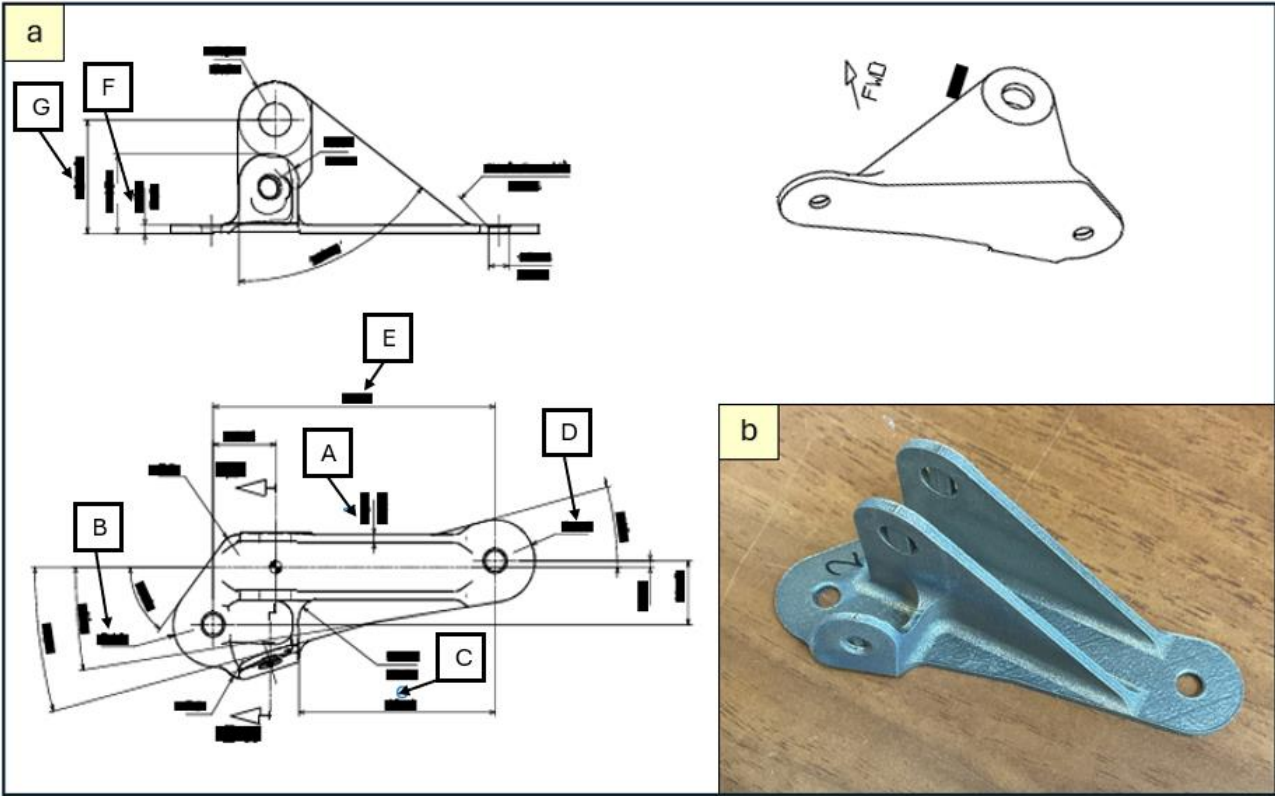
a) Clevis technical drawing (© Leonardo S.p.A.) b) Clevis perspective.
